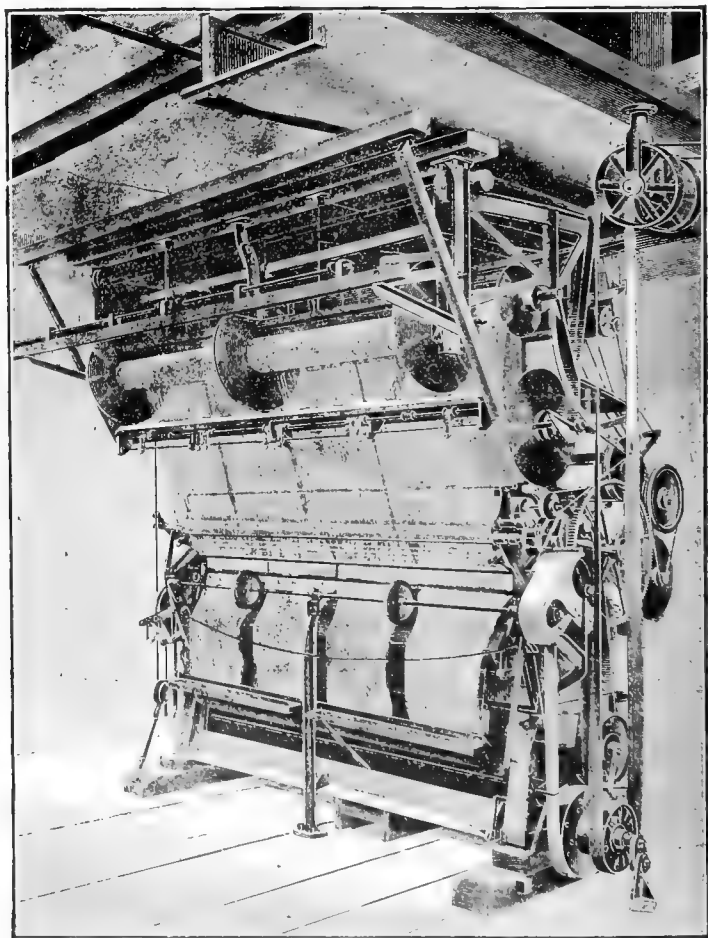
The Paget warp-knitting machine. (Front view.)
